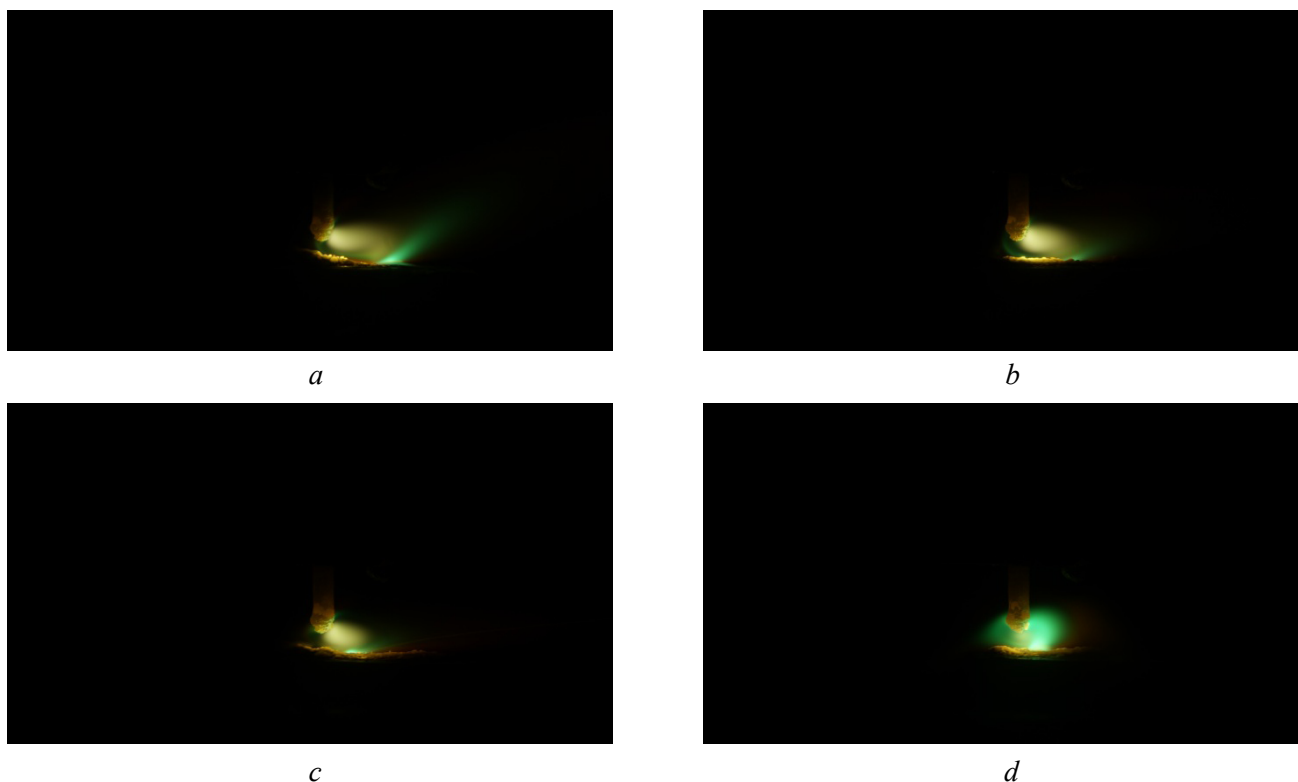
The process of welding steel *St3* with TiO_2 C flux applied in a 0.05 mm layer using a bonding varnish:
